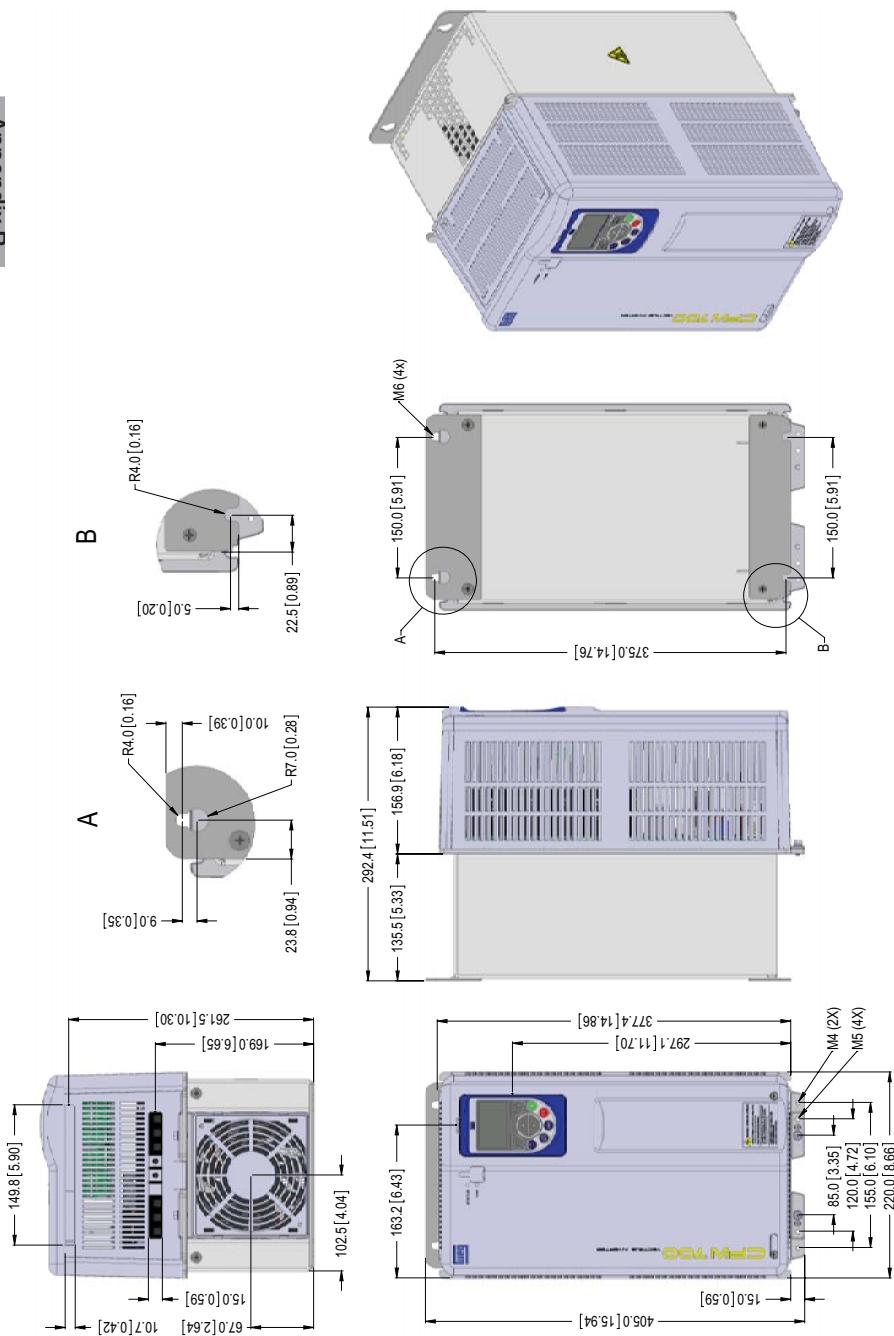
Inverter dimensions in mm [in] - frame A
